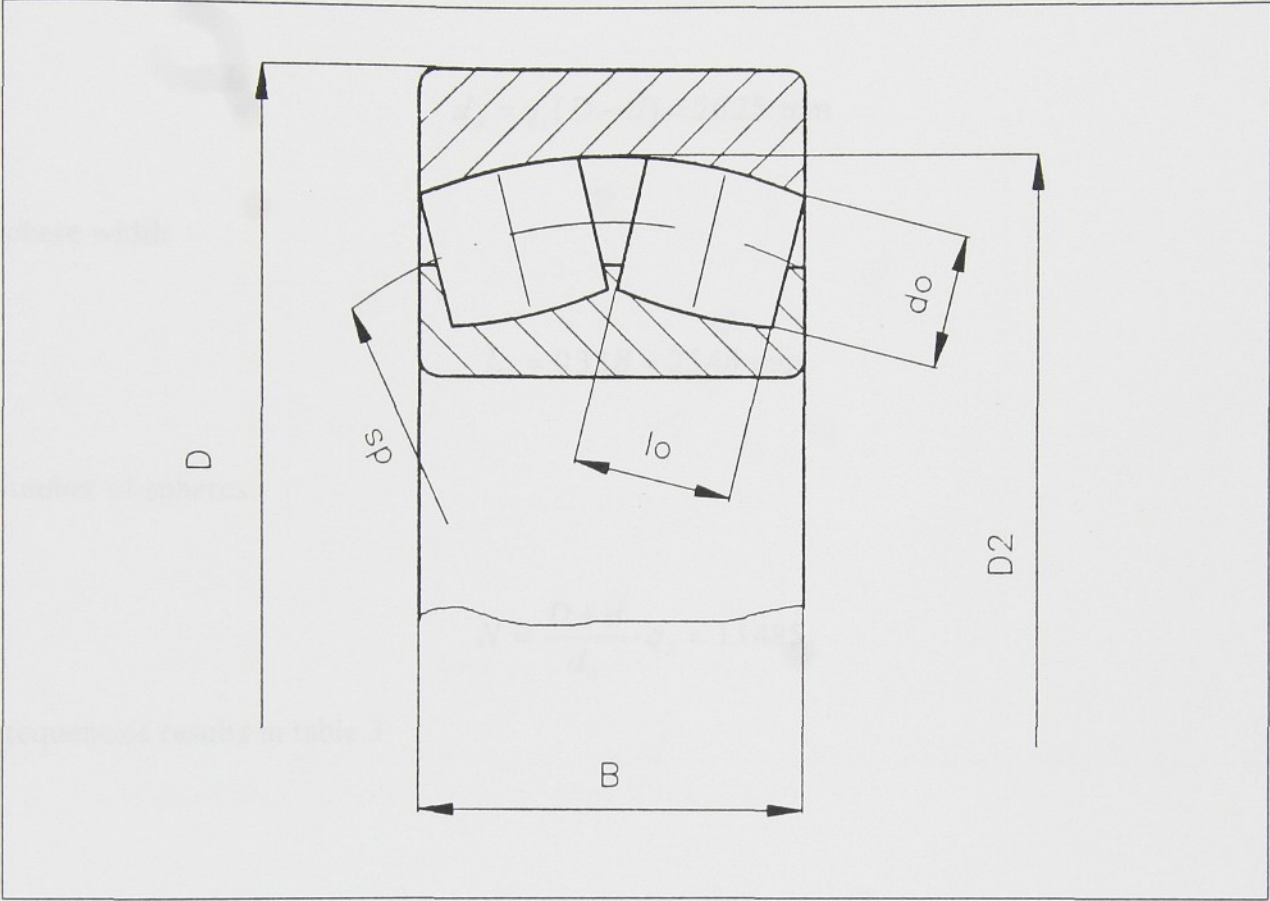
Dimensions of spherical roller bearing Type 22319.
